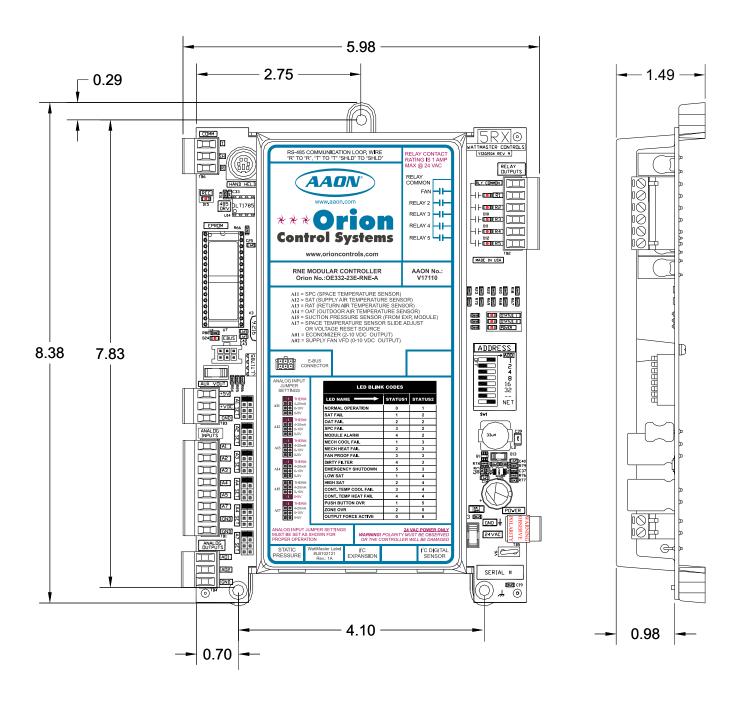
OE332-23E-RNE – RNE Modular Controller Dimensions
